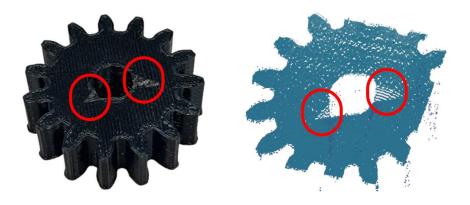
Defect Inspection (Left: Real Gear, Right: 3D Scanning Result)
